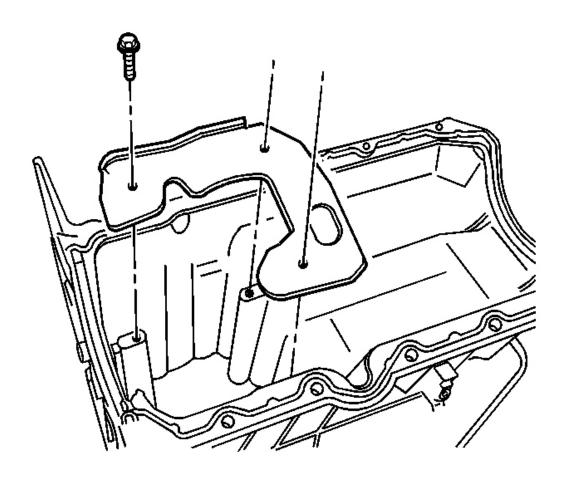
View Of Oil Pan Baffle Bolts & Baffle Courtesy of GENERAL MOTORS CORP.
